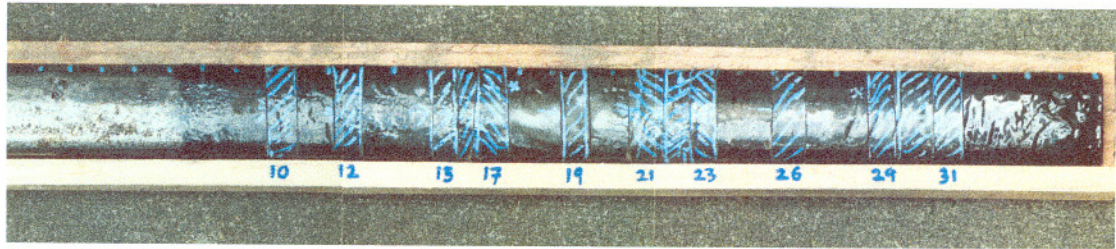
Sectioning of rolling load specimen, RL1.
